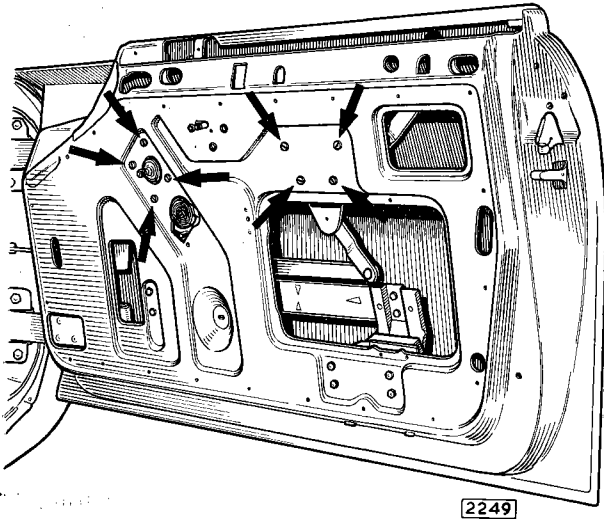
Showing the screws securing the front window winding mechanism to the door frame
